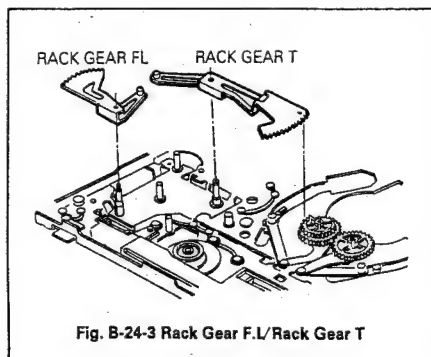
Rack Gear F.L/Rack Gear T
